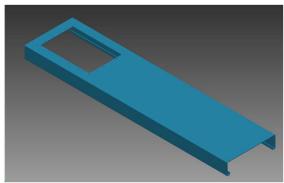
Flume seabed structure. Water outlet part (Hole dimensions 400 mm x 600 mm).
